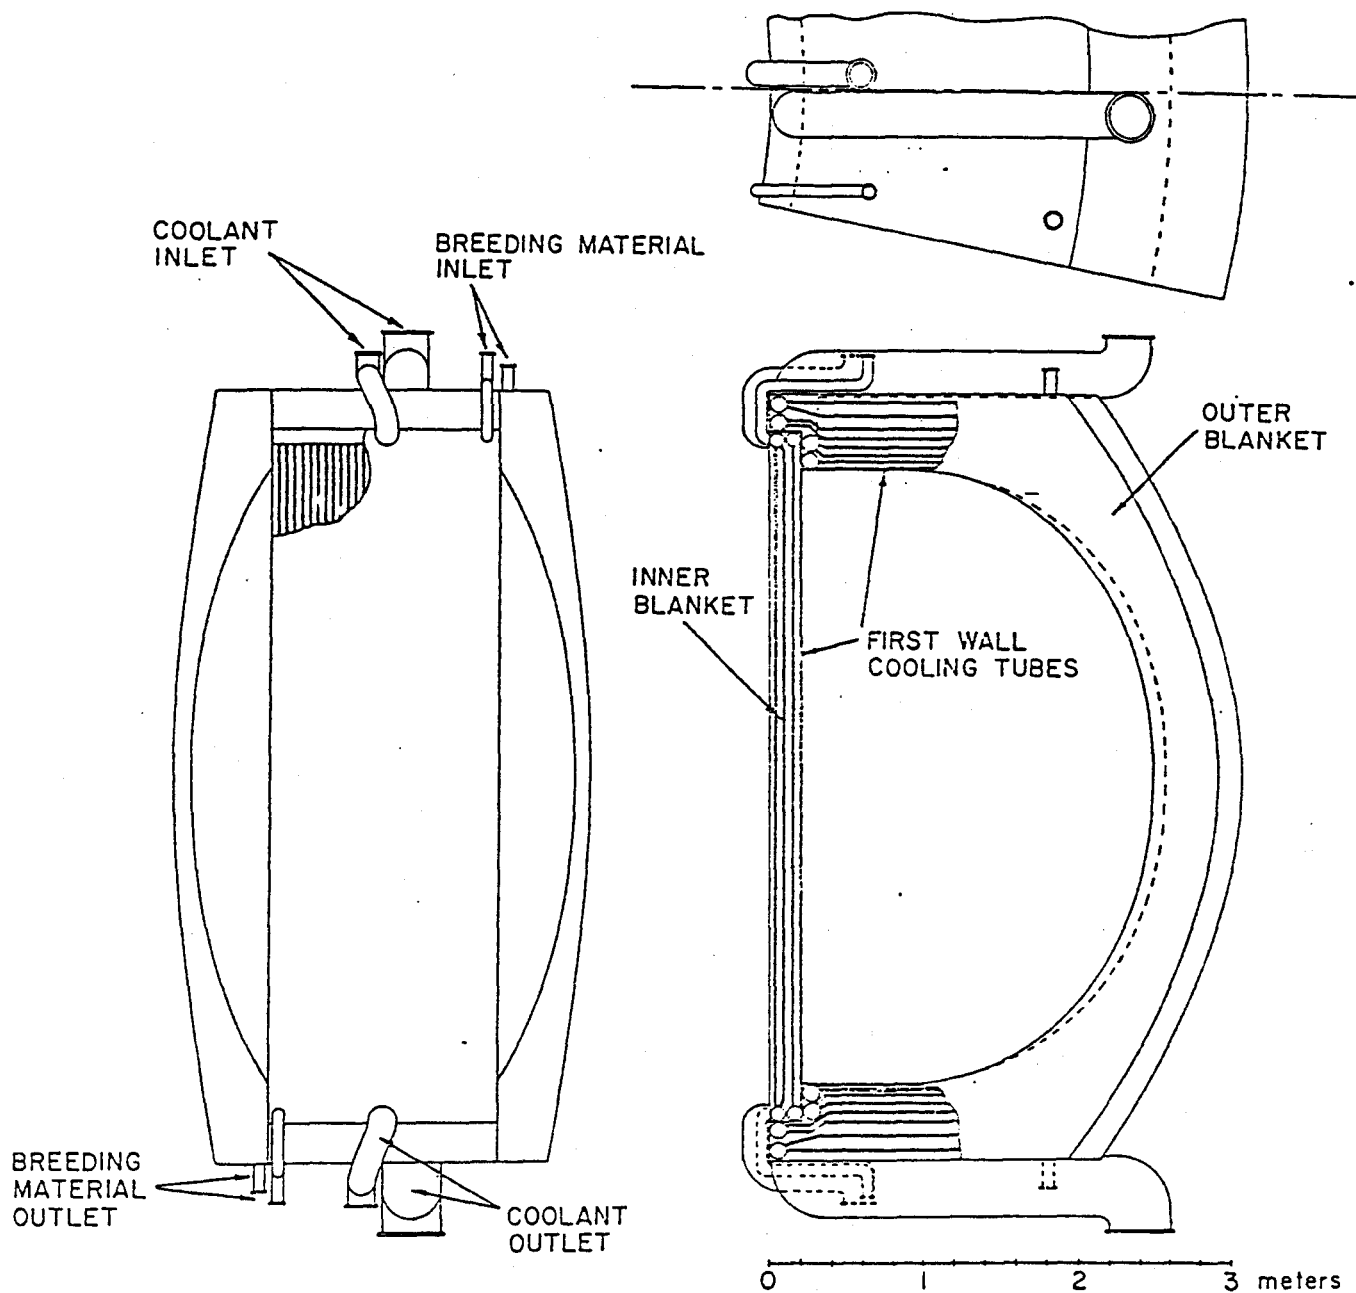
Cross-Sectional View of Blanket (Reference 4).
